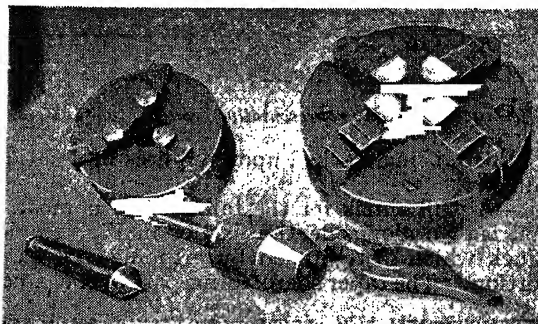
Showing carriers of drop-forged steel, a drill chuck for the tailstock, a conical lathe centre, and three- and four-jawed chucks.
